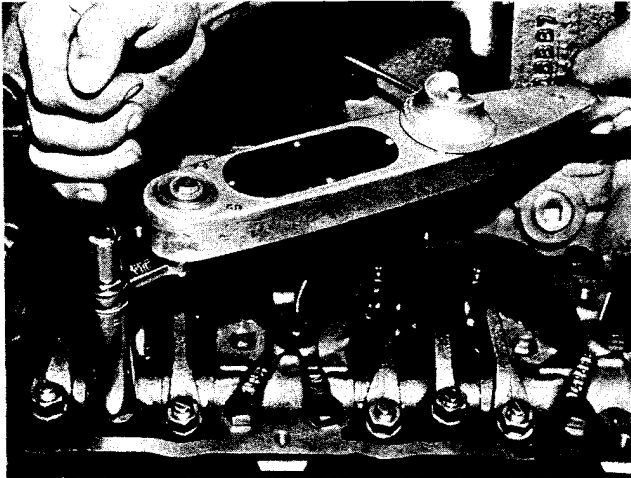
, (V414201). Torquing injector adjusting screw locknut with ST-669
